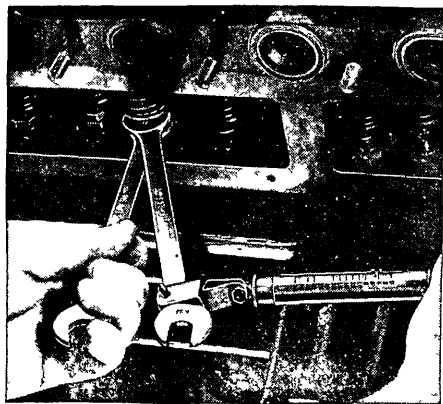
Using spring scale to check tension in self-locking tappet adjusting screw, 1939-52 Champion
